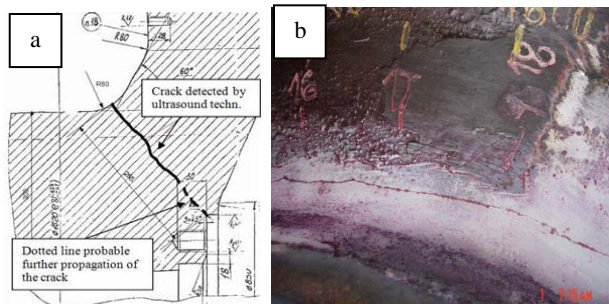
a Horizontal shaft crack; b Shaft to flange transition radius; damaged protective coating and shaft material crack along the perimeter
